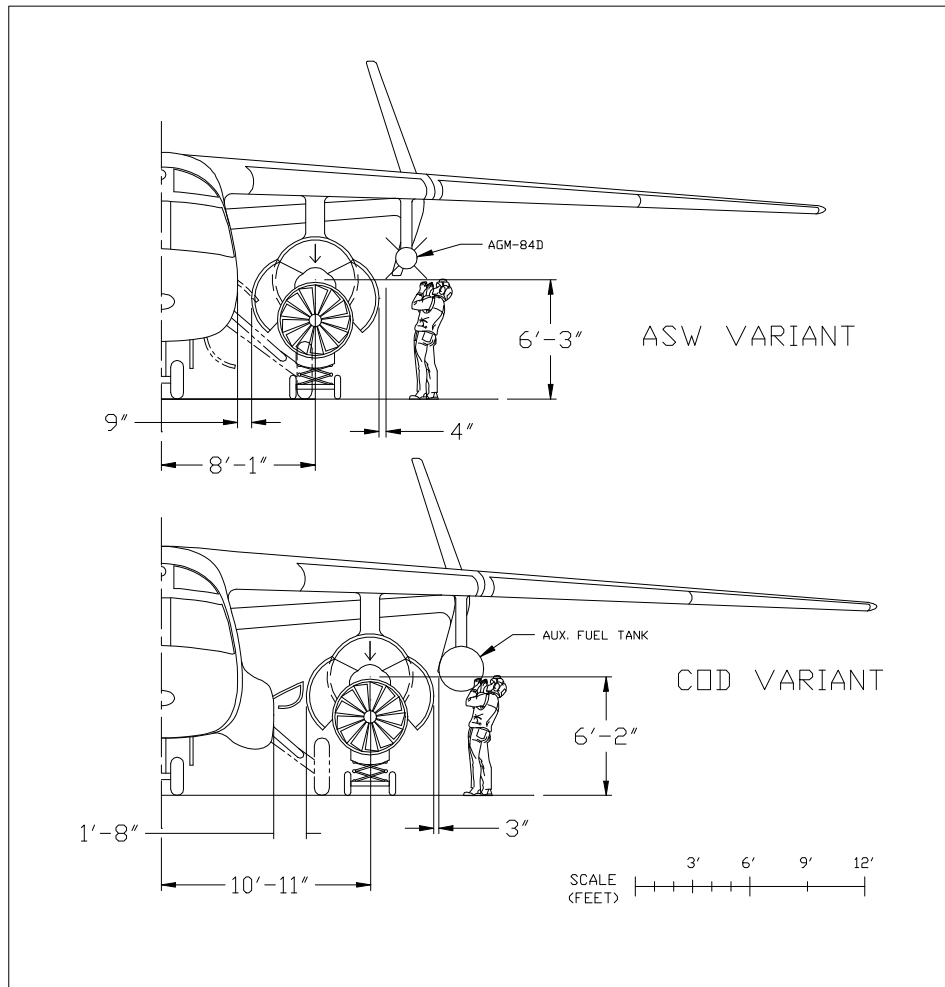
Engine Clearances for the COD and ASW with Engine Removal
